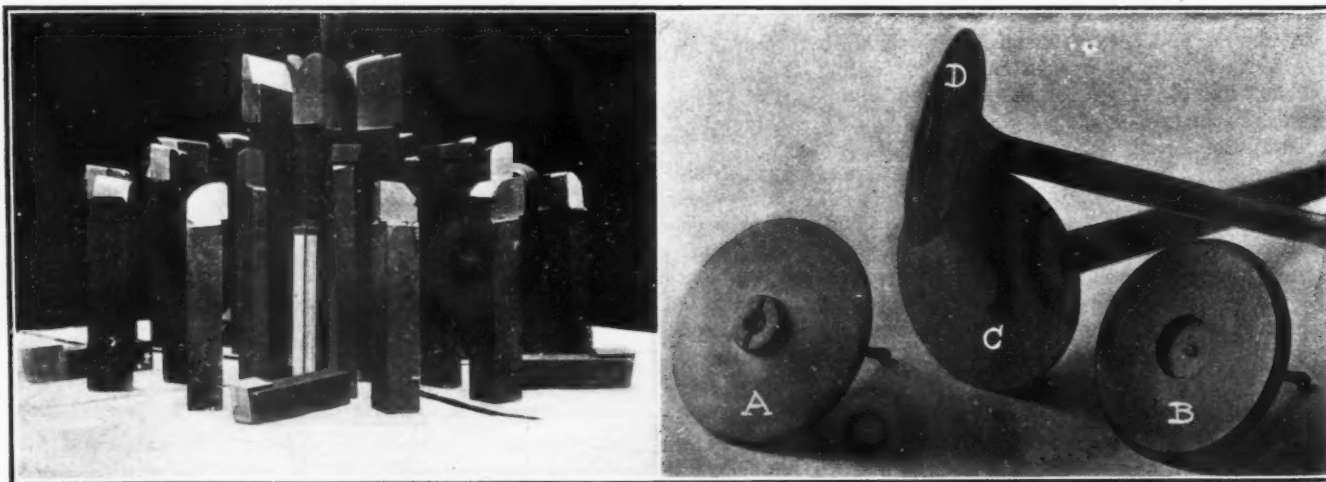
Left—Tools made by welding by the Rosner process. Right—Valve in various stages of manufacture
